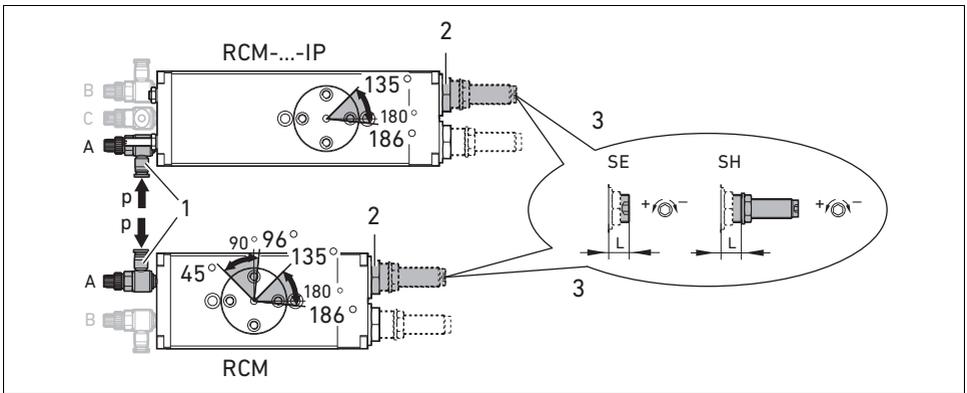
Adjusting the end position 90° (45° – 96°) / 180° (135° – 186°)
